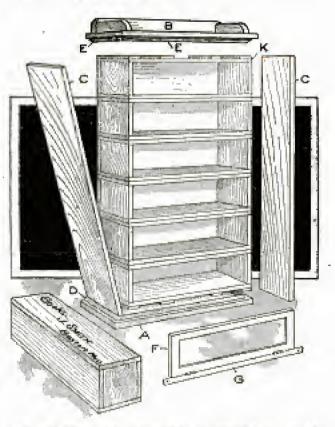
Case in Sections Ready for Assembling, and a Section Box Closed Ready for Shipment
